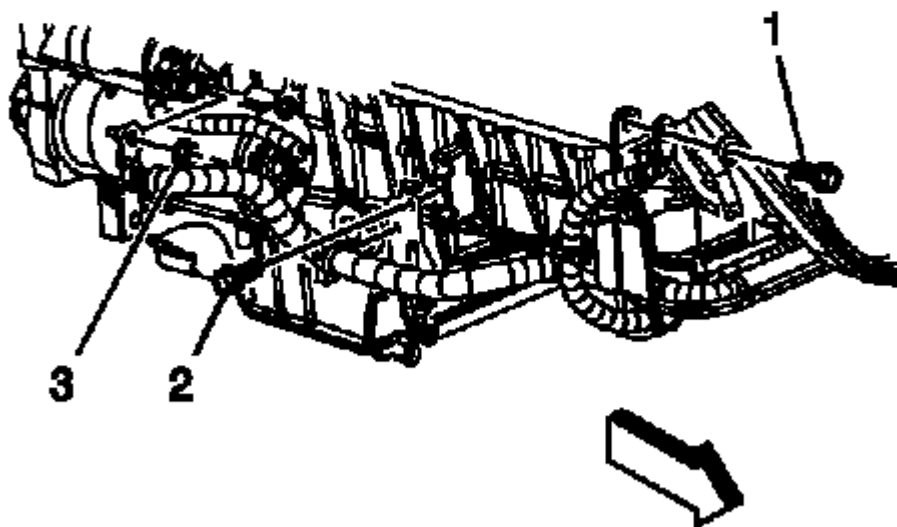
View Of Engine Wiring Harness Ground/Negative Battery Cable Bolt (4.3L Engine)
